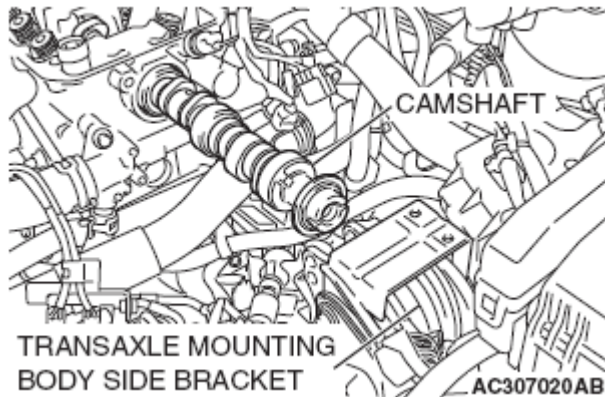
Removal Camshaft And Transaxle Mounting Body Side Bracket
